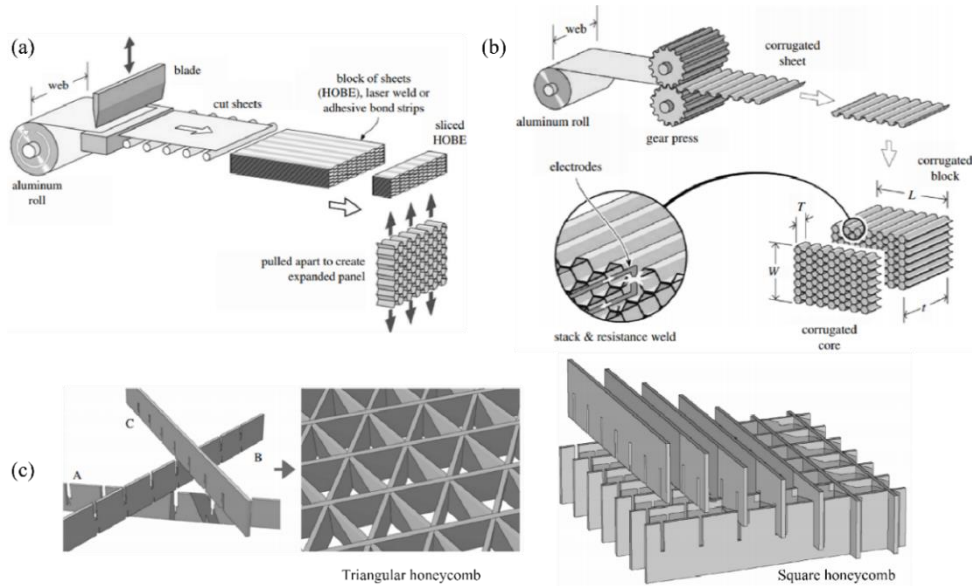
The different methodologies and processes for manufacturing honeycomb structures [41]. (a) Expanded manufacturing process and (b) corrugated manufacturing process for fabricating hexagonal honeycombs, and (c) trip slotting methodology for fabricating triangular and square honeycombs.
